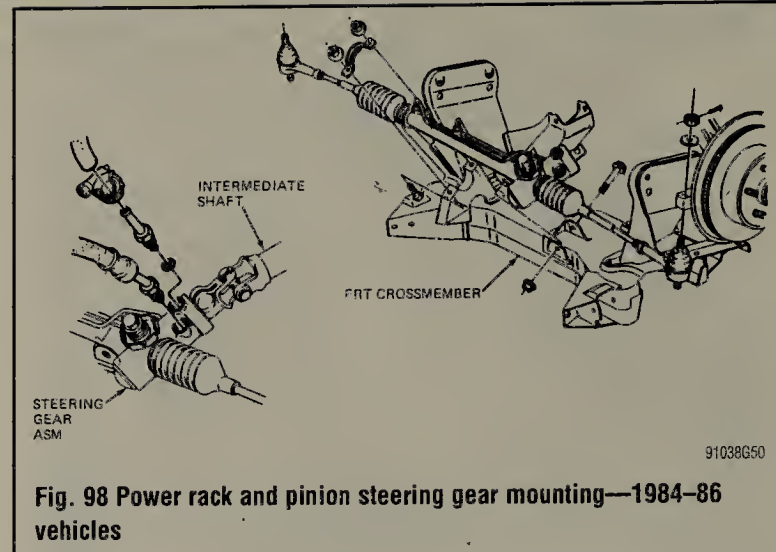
Power rack and pinion steering gear mounting—1984-86 vehicles
